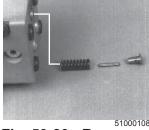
Remove Adjustment Spring and Pilot Piston
